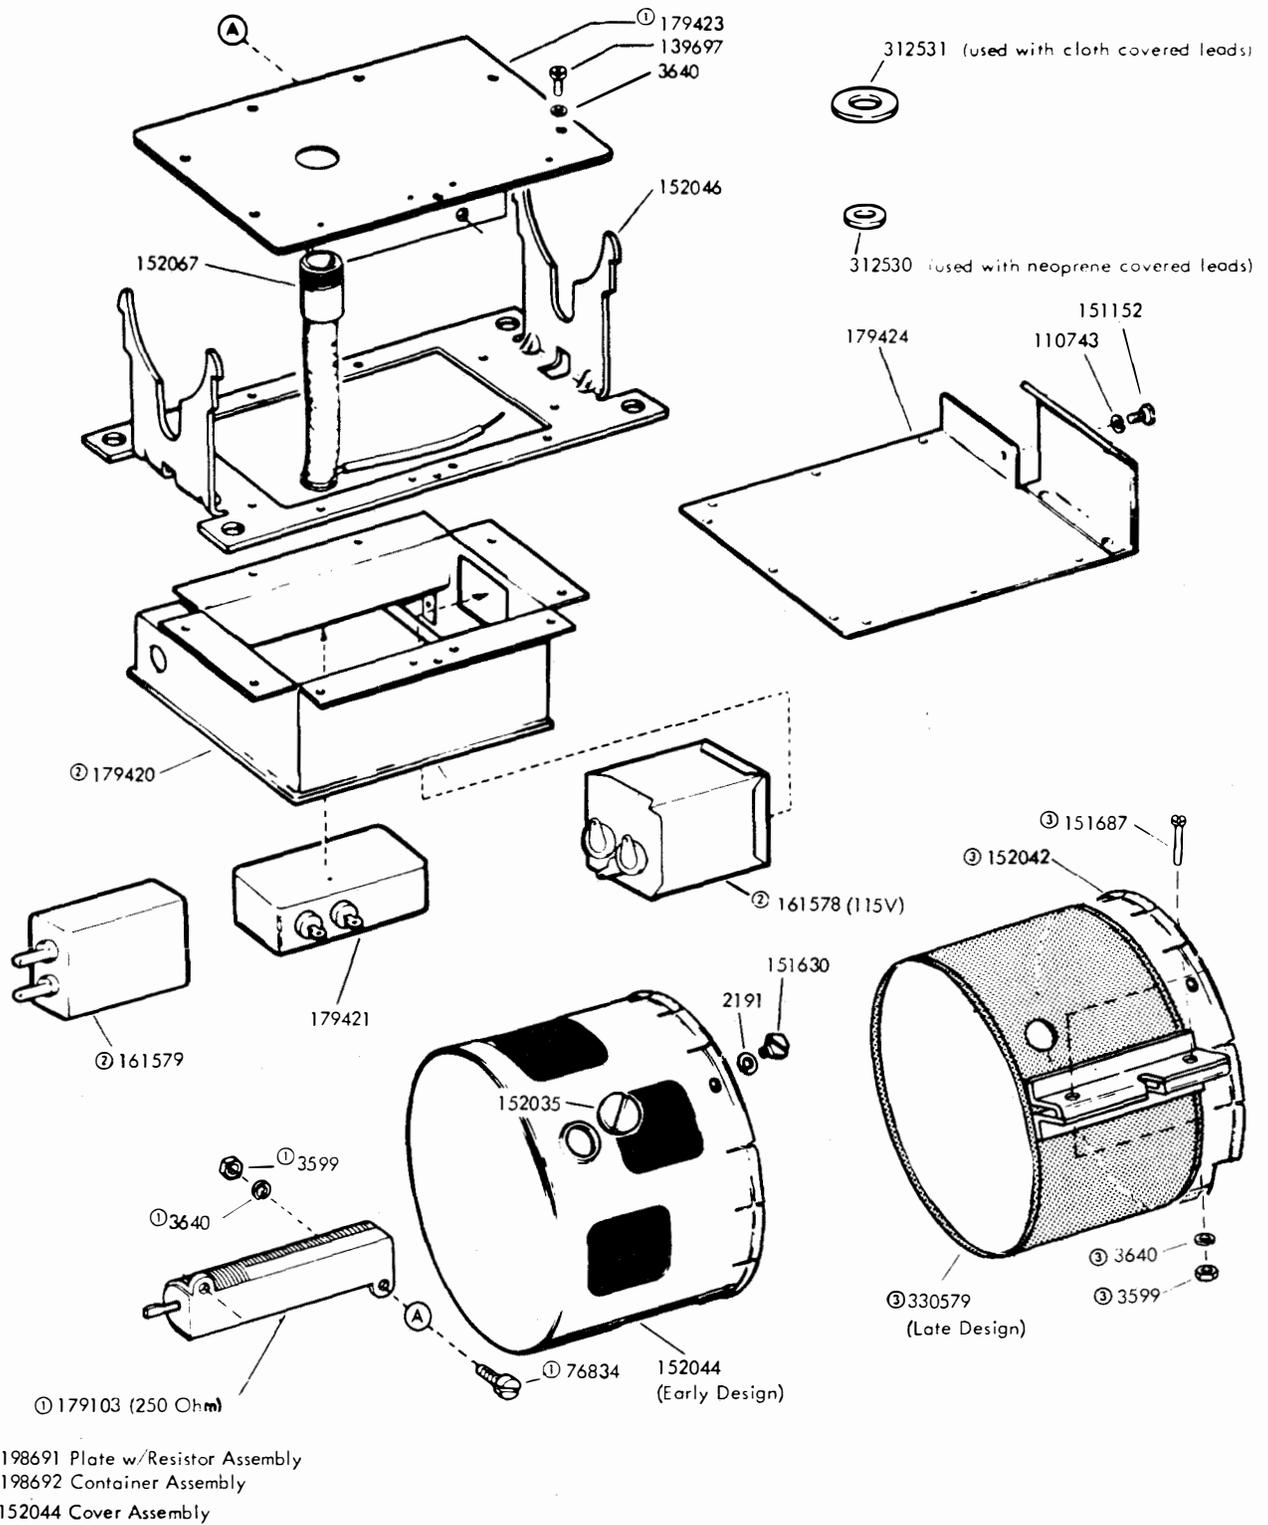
Series Motor Mounting Parts with RF Suppression - Used on LMU39 and LMU41
